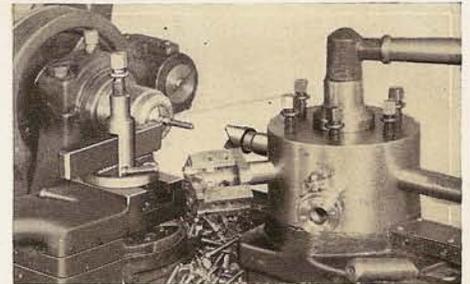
Draw-in Collet Chuck and Turret for Manufacturing
